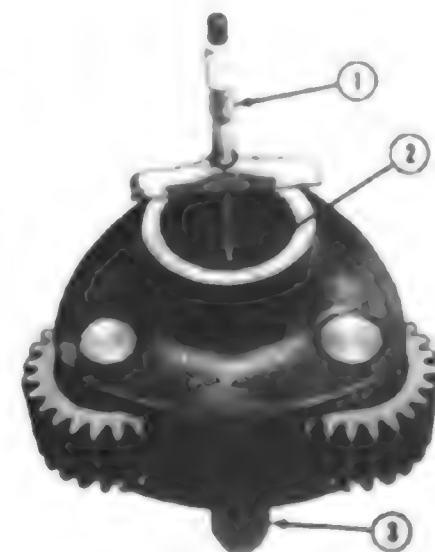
With planetary drive shaft supporting the retainer, use a depth micrometer to obtain hub to retainer dimension as shown. Refer to text.
